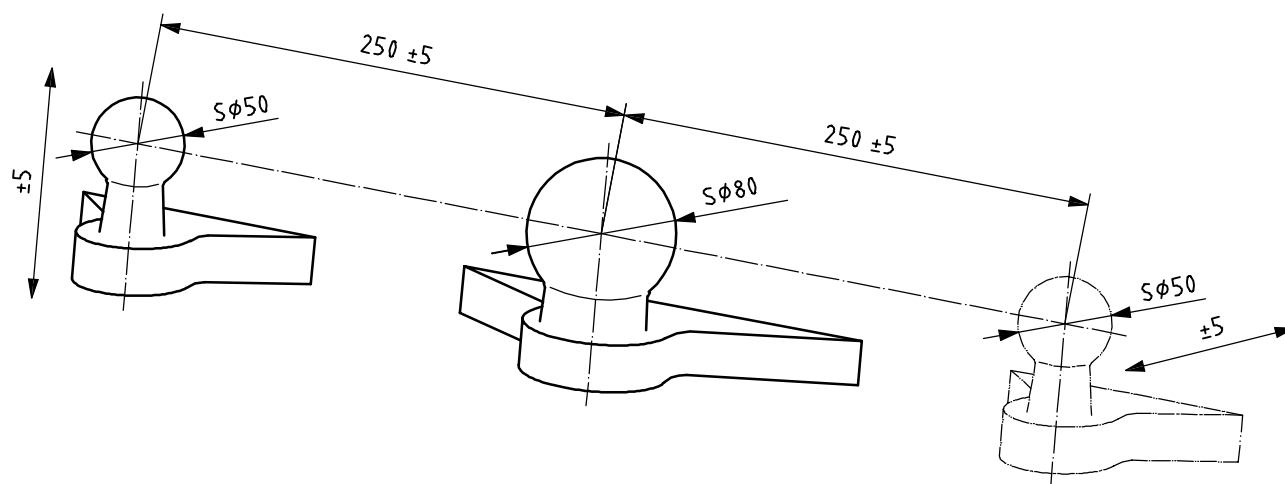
Location of connecting point(s) of tractor (50 mm ball) in relation to 80 mm ball-type coupling device
